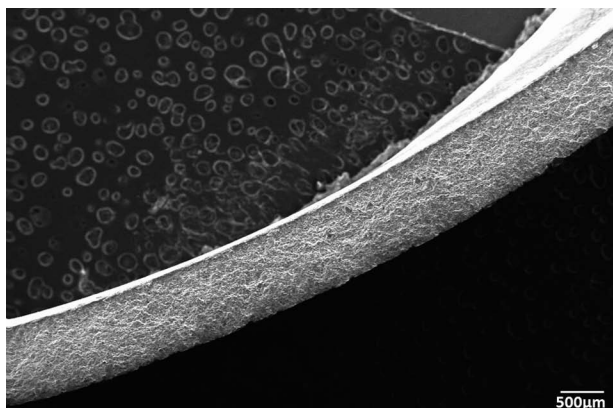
Low magnified fractograph of AA 2219 tube specimen tested in tension
